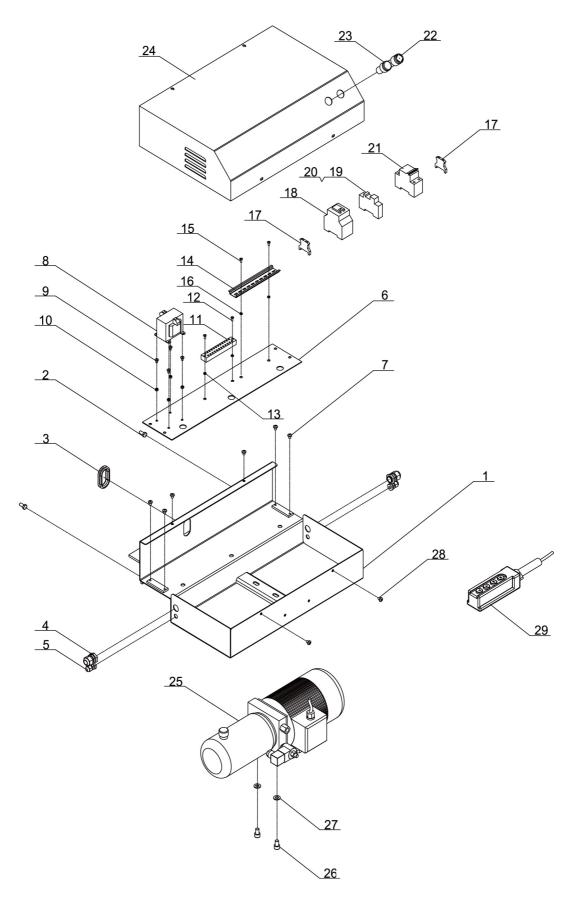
Spare parts drawing 4 - FHT-B 1200
